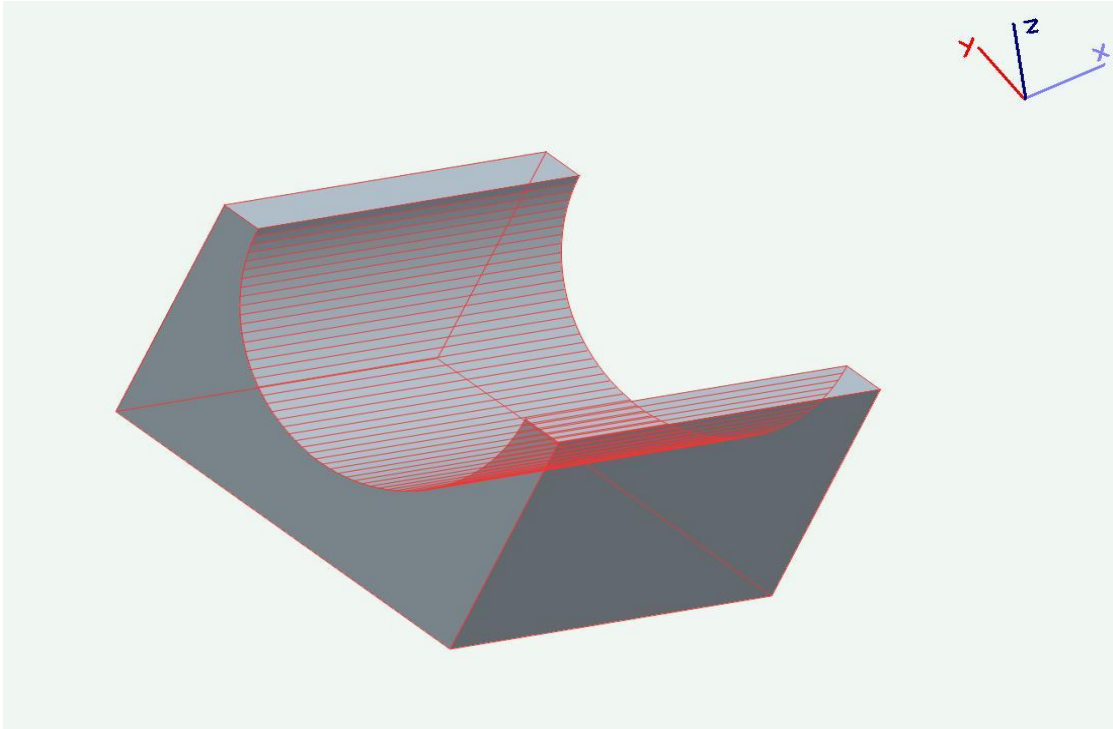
Cylindrical part cut along X-axis(Model 3)
